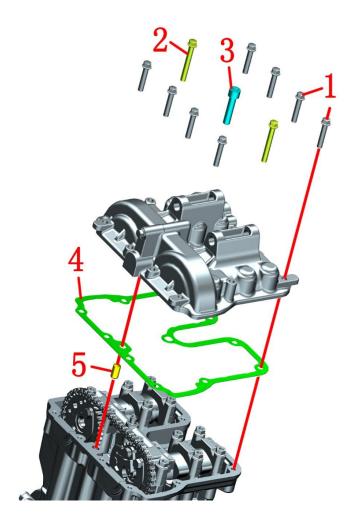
CYLINDER HEAD		Remove the cylinder head cover assembly 1	CHK
